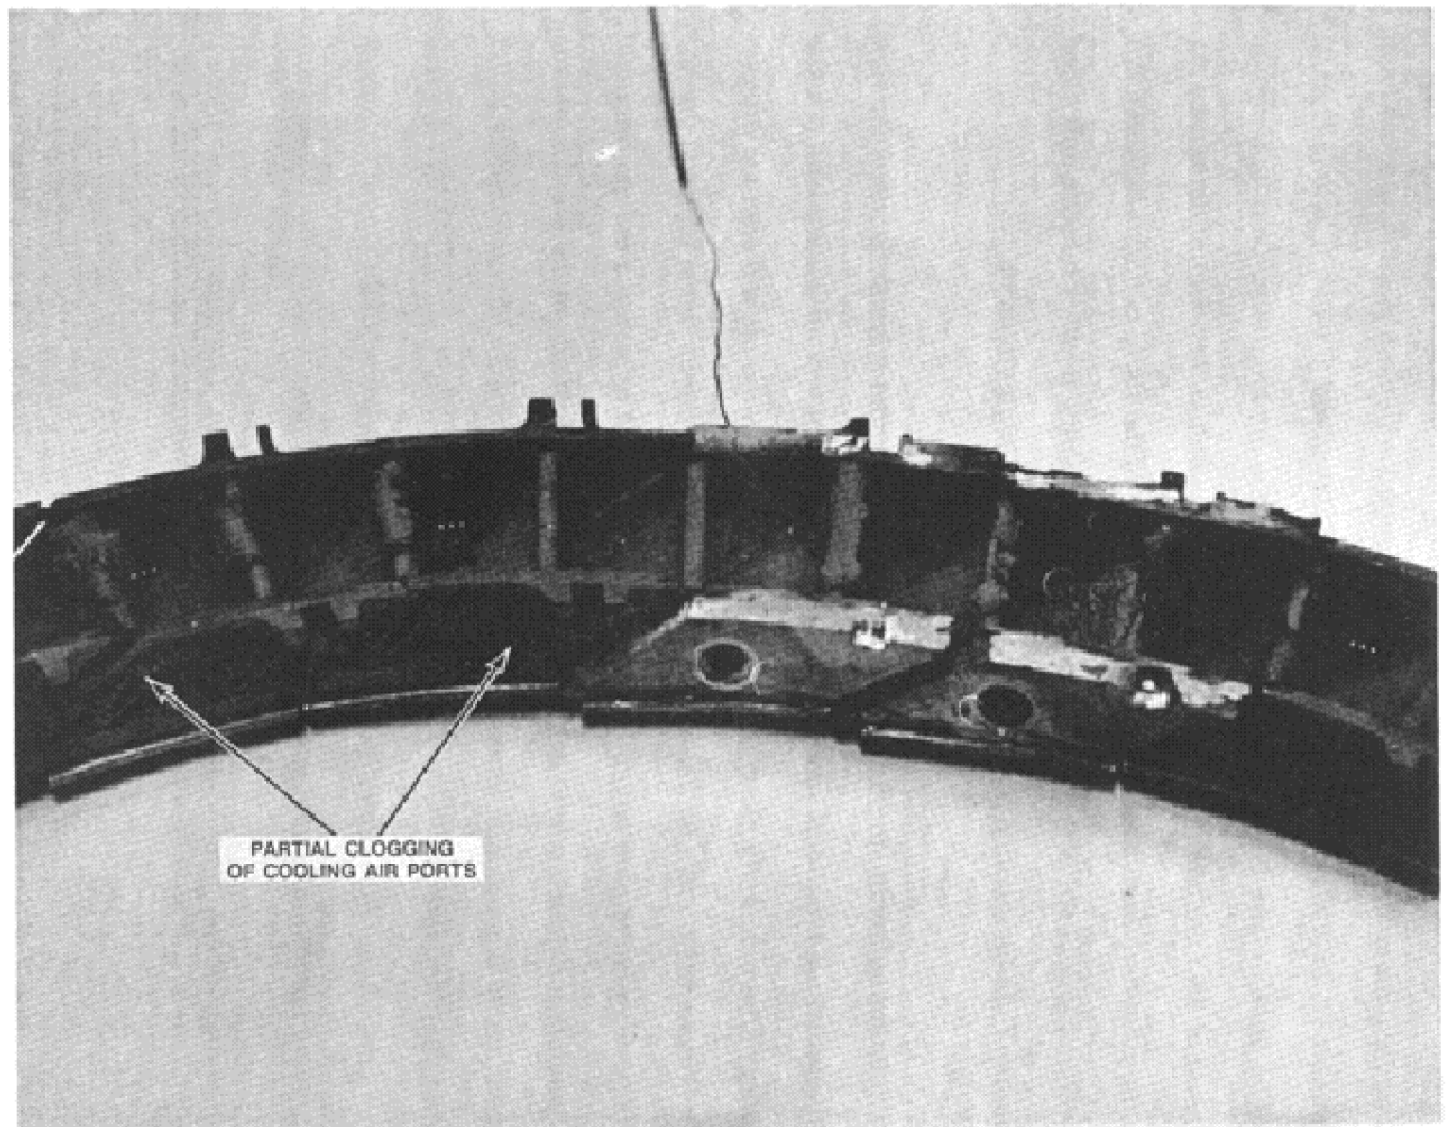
View of nozzle guide vanes showing partial blockage of cooling air ports.
